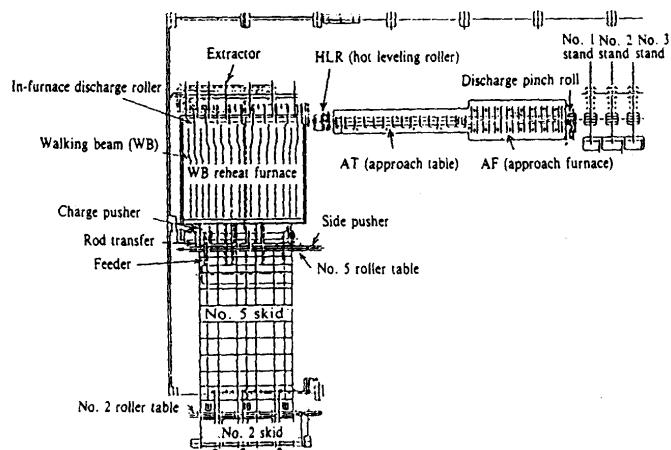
Material flow of billet reheating furnace at Kimitsu wire rod mill
